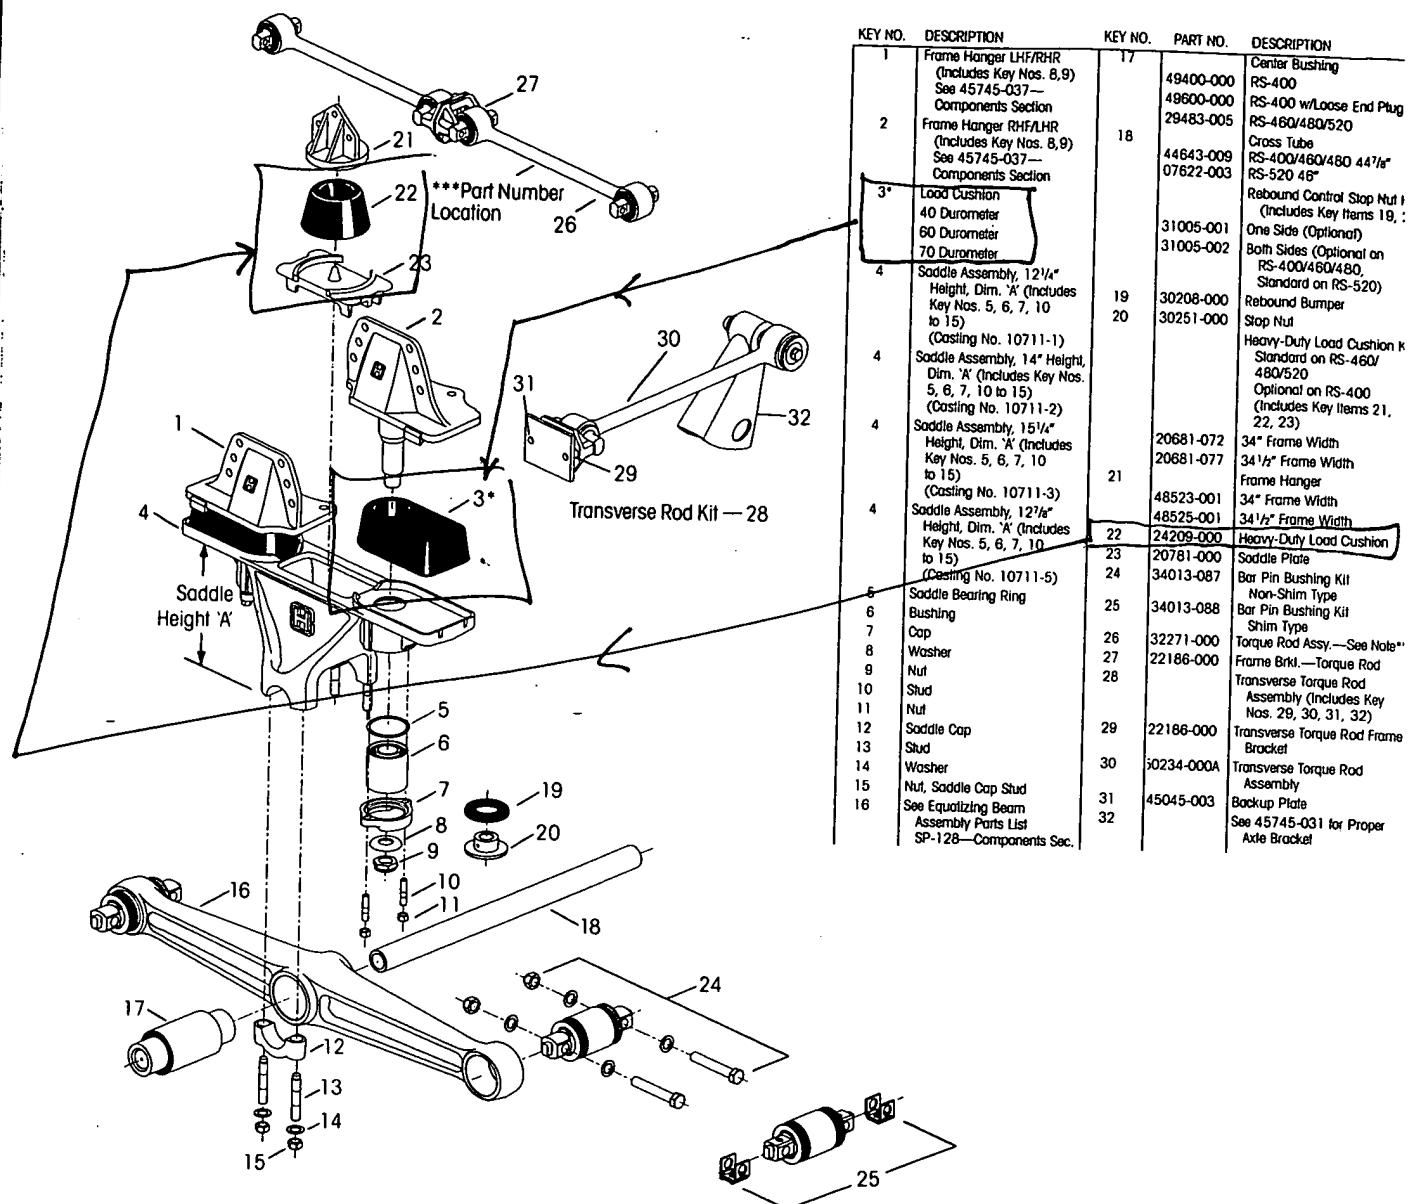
Exploded view of an RS rubber-load cushion system.
